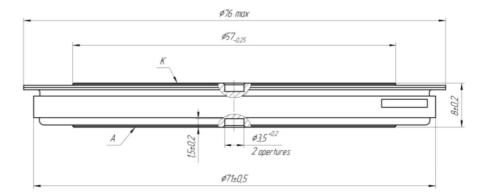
Dimensions of D063-11500 welding diode in ceramic housing.
